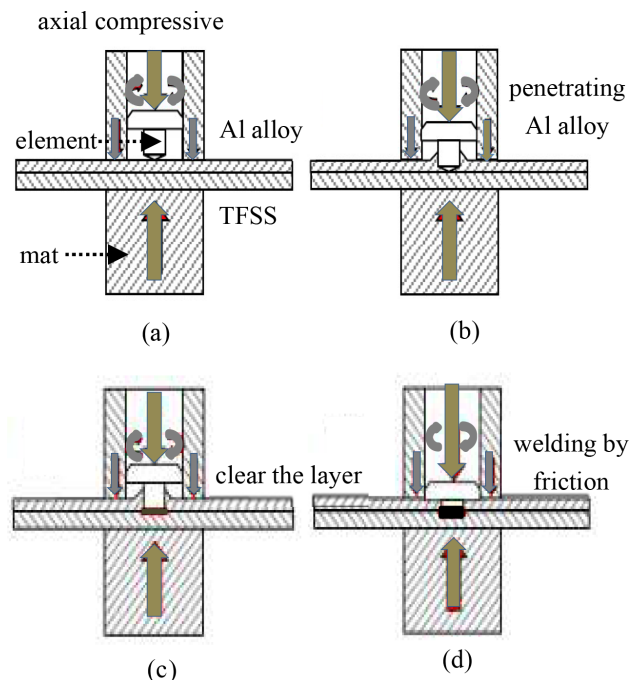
Principle of RES welding. (a) Preheating; (b) Penetrating; (c) Interface cleaning; (d) Friction welding.
